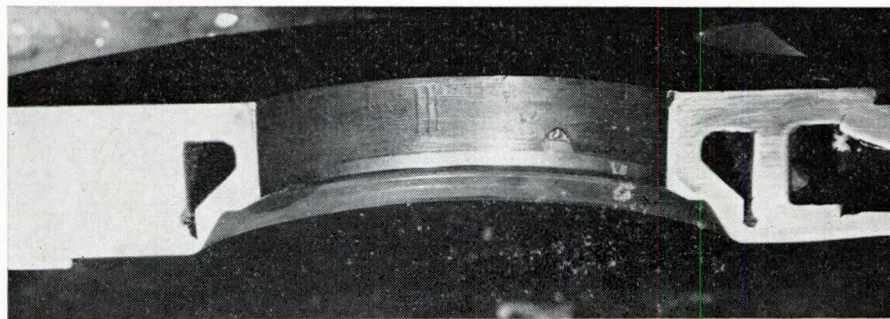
Cross section of A.O. flame plate showing corrosion/erosion in the cooling water passage surrounding the valve seat (1070h)
